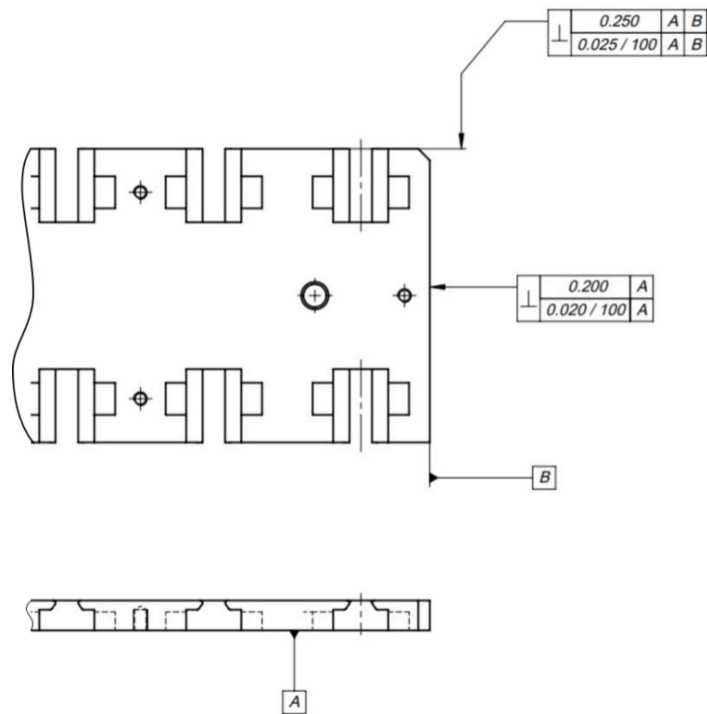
Top Component's Reference Surfaces Geometric Tolerancing
